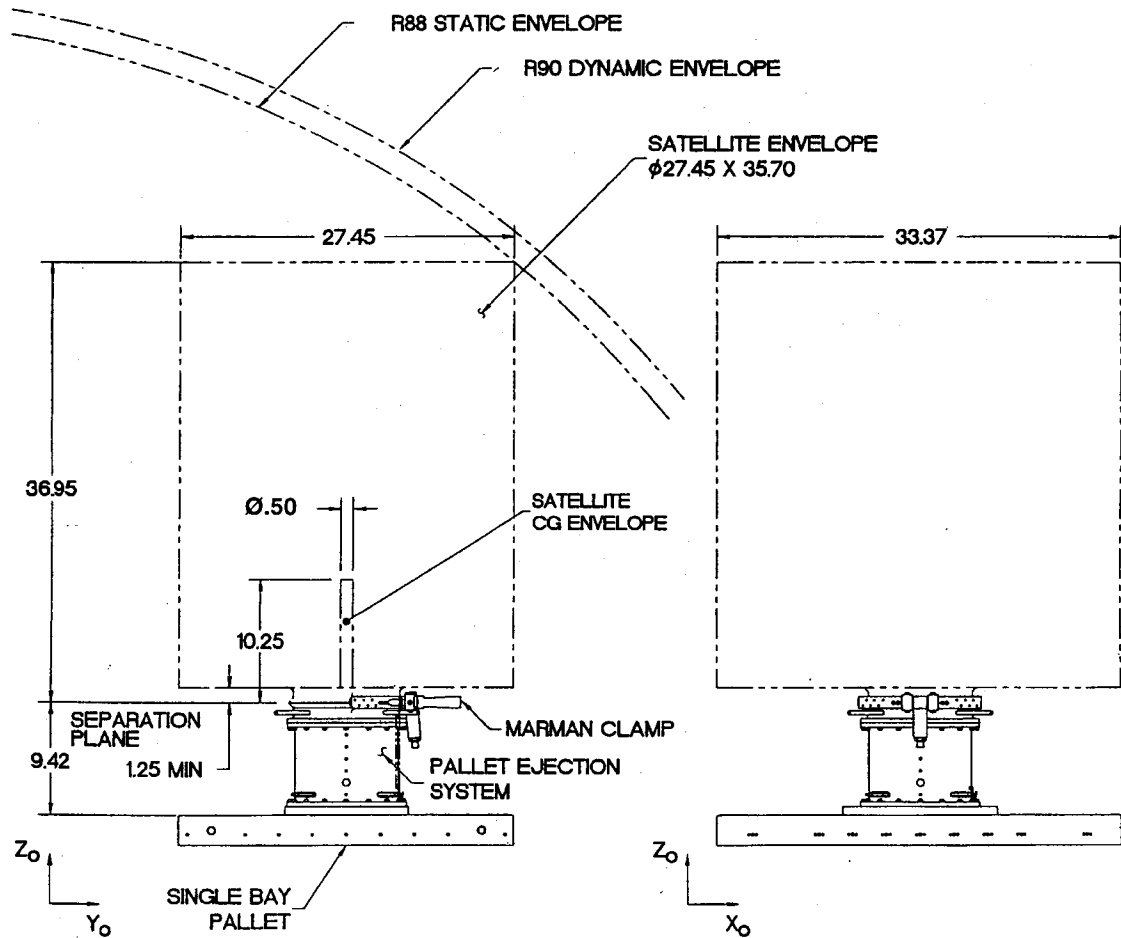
PALLET EJECTION SYSTEM ON SINGLE BAY PALLET
